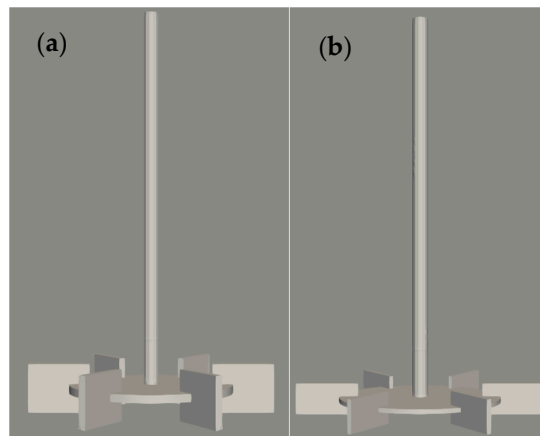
Impeller drawings for the Rushton turbine considering blade height ((a) D/4 and (b) D/8).
